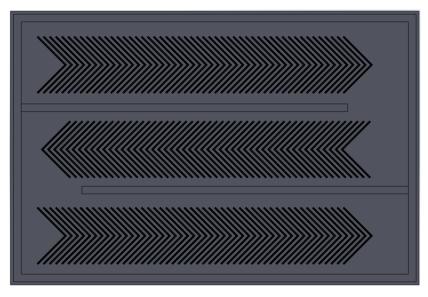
Aluminum Sheet with V shaped pattern engrooved on it
